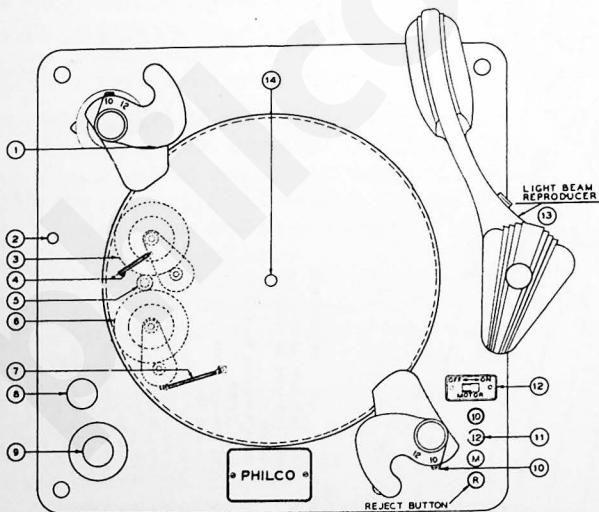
PART LOCATIONS — TOP OF CHANGERS RIM DRIVE TYPE
